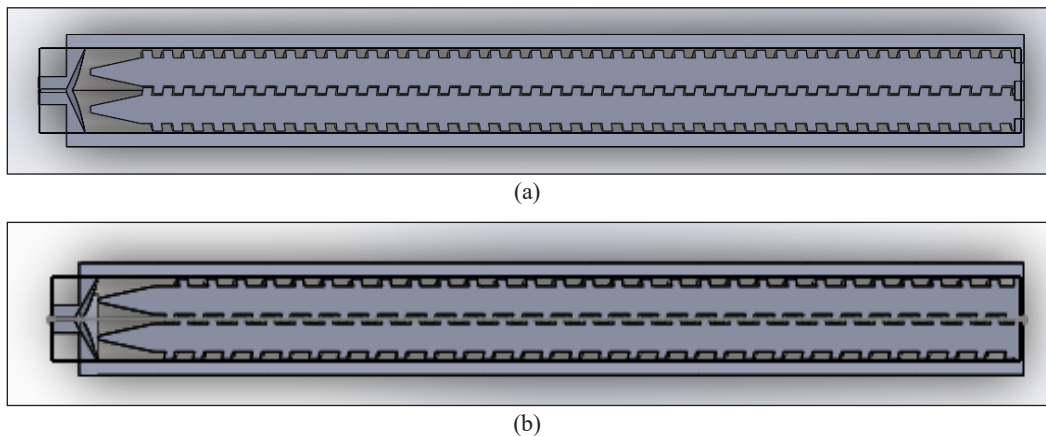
Cross-sectional view of (a) counter-rotating and (b) co-rotating, intermeshing twin-screws
